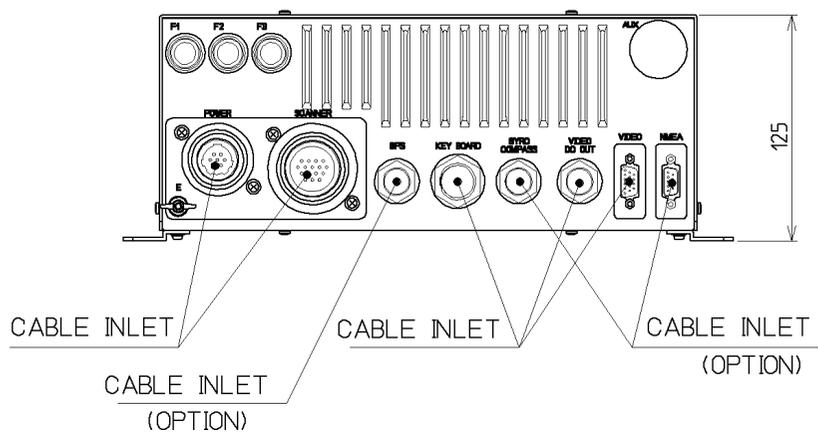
OUTLINE DRAWING OF SCANNER UNIT NKE-2102
